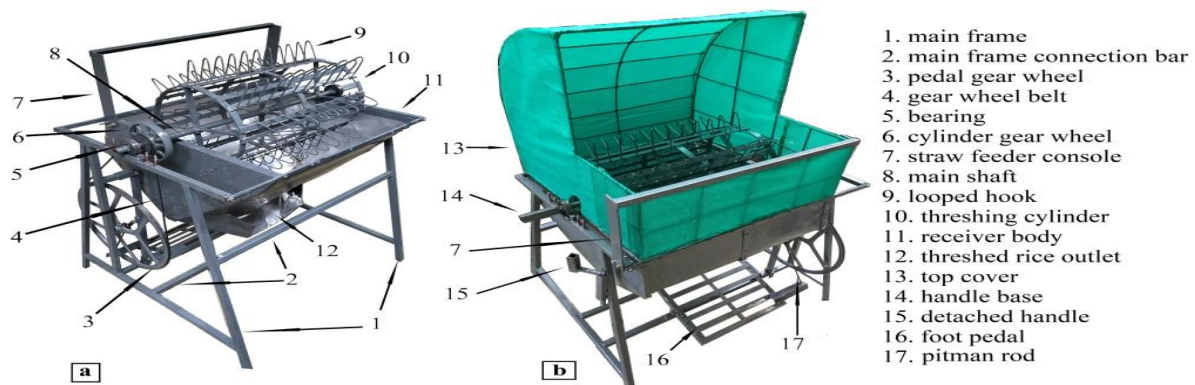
The front (a) and rear (b) view of the rice thresher showing different components of the machine.
